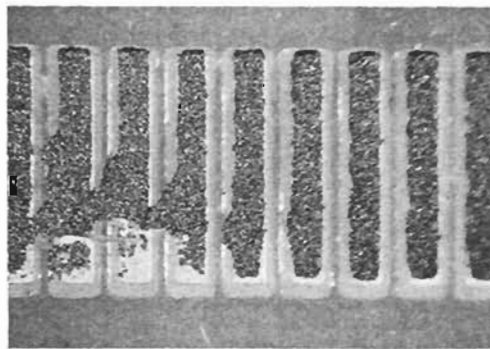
Pb62 smear on surface mounted board pads (EPS)
